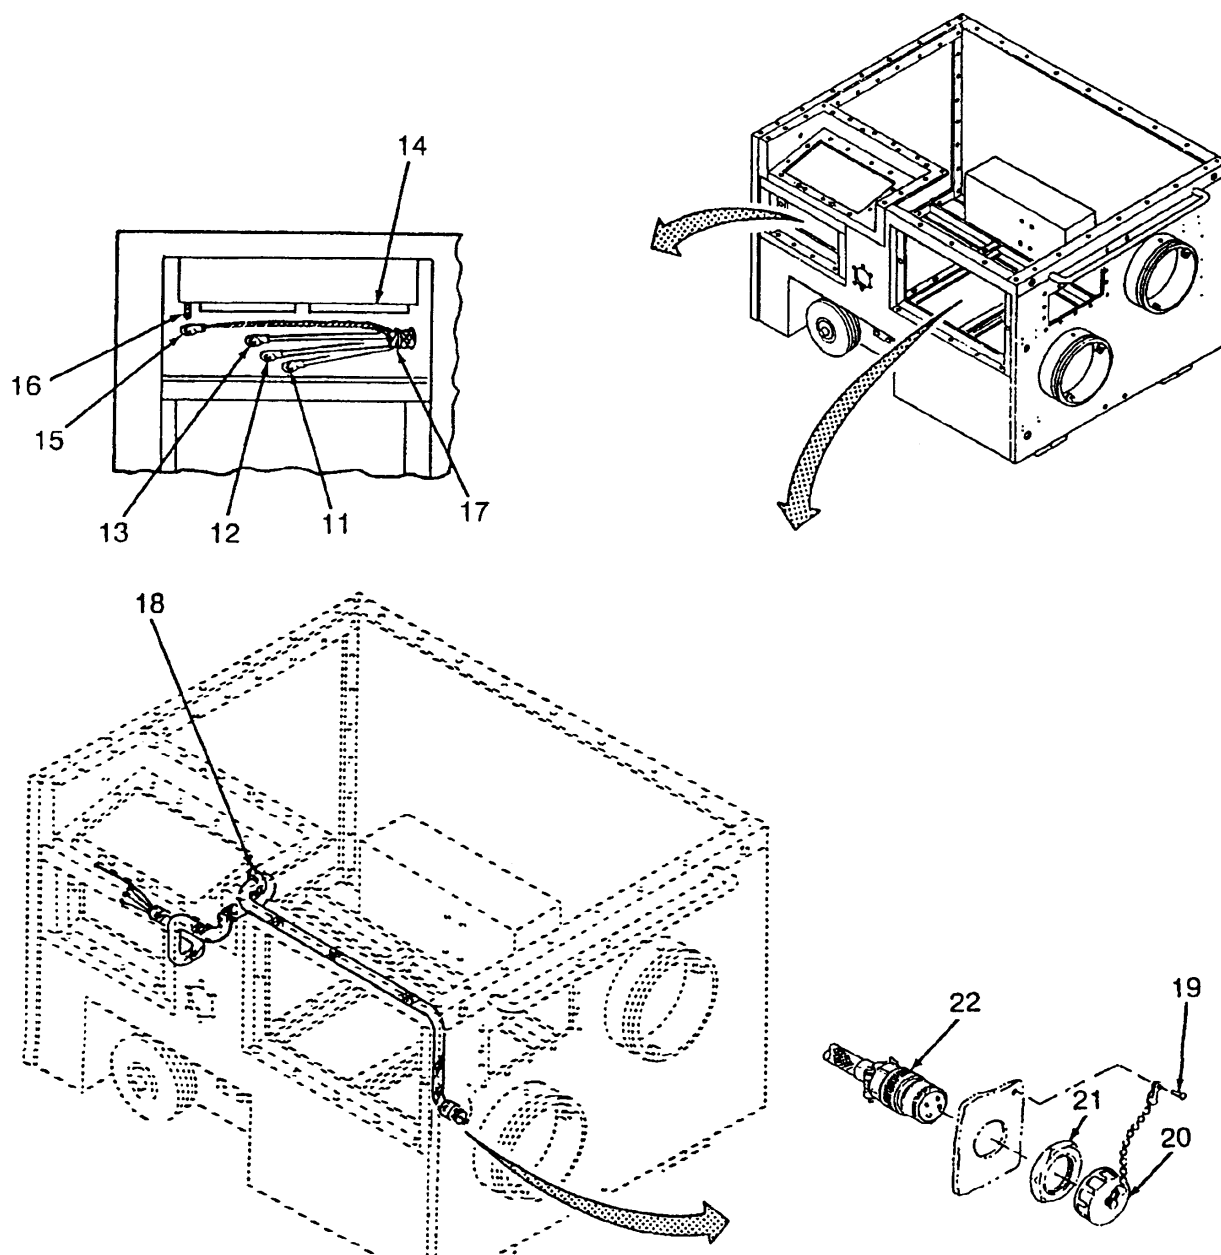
Frame Assembly Disassembly (Sheet 2 of 2)
